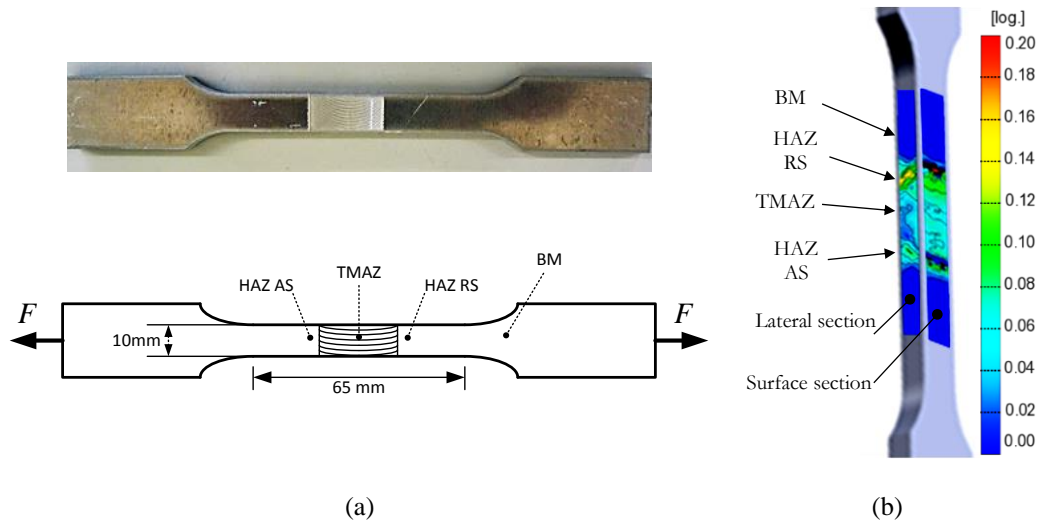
Weld transverse tensile sample picture and scheme (a), and DIC strain maps registered during testing (b).
